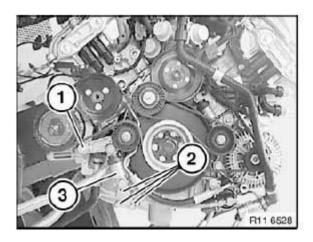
Identifying Belt Tensioner And Screws Courtesy of BMW OF NORTH AMERICA, INC.
